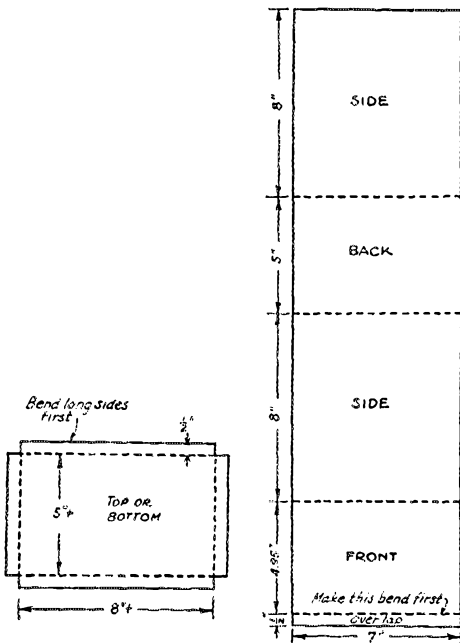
TYPICAL LAYOUT FOR BENDING
